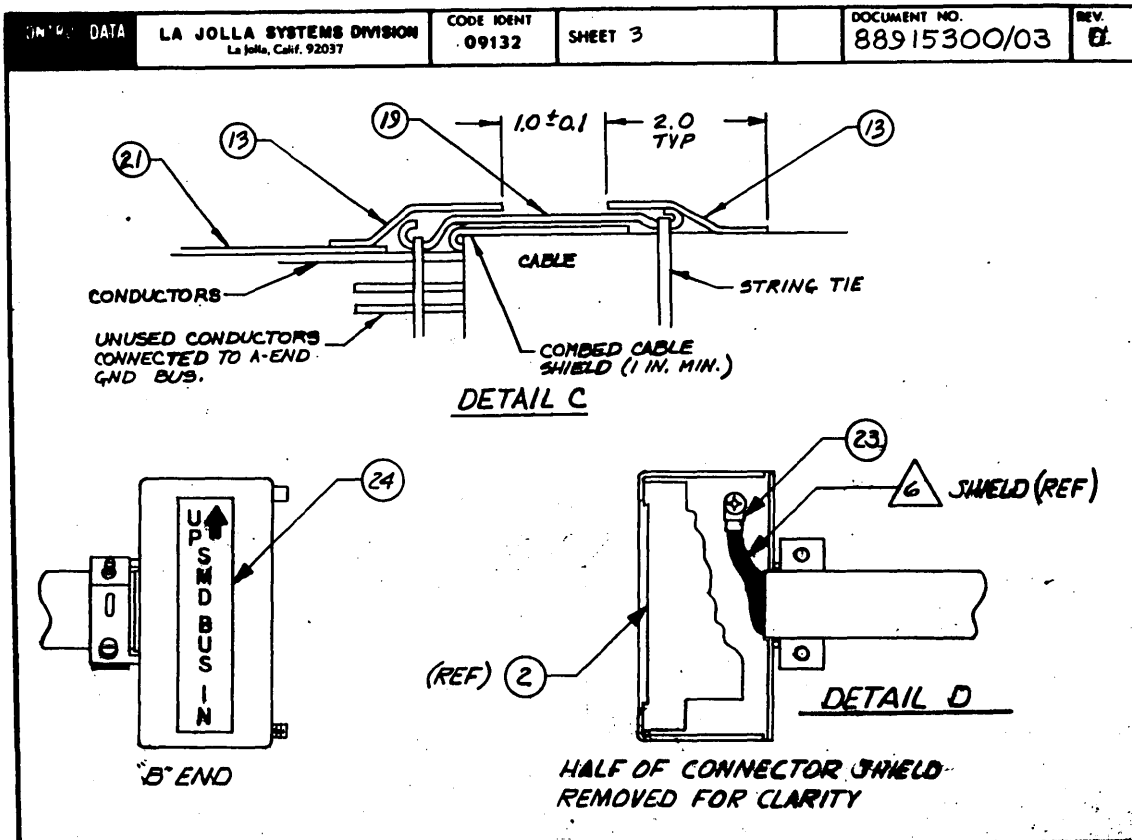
Cable Assembly - Disk Adapter to Control Unit Single CPU Bus In (Sheet 1 of 8)
